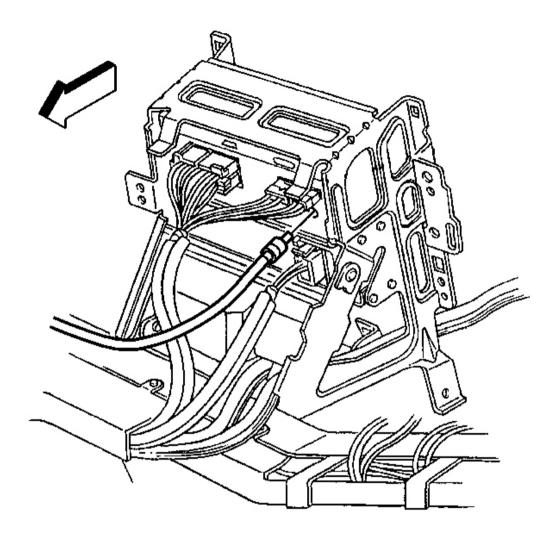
Power Antenna Coaxial Extension Cable At Radio Control Courtesy of GENERAL MOTORS CORP.
